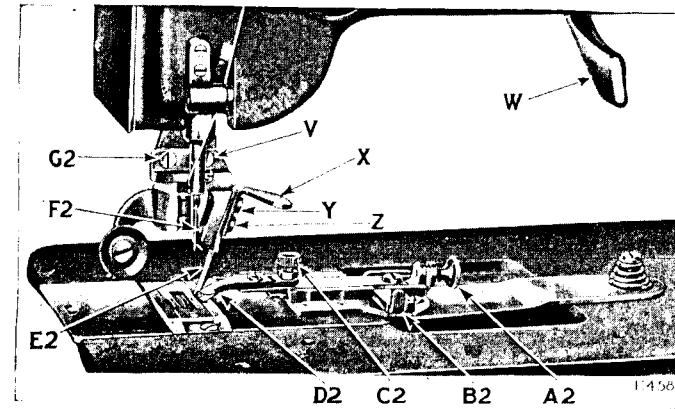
Adjustments on Trimmer and Edge Guide on Machine 110w127
